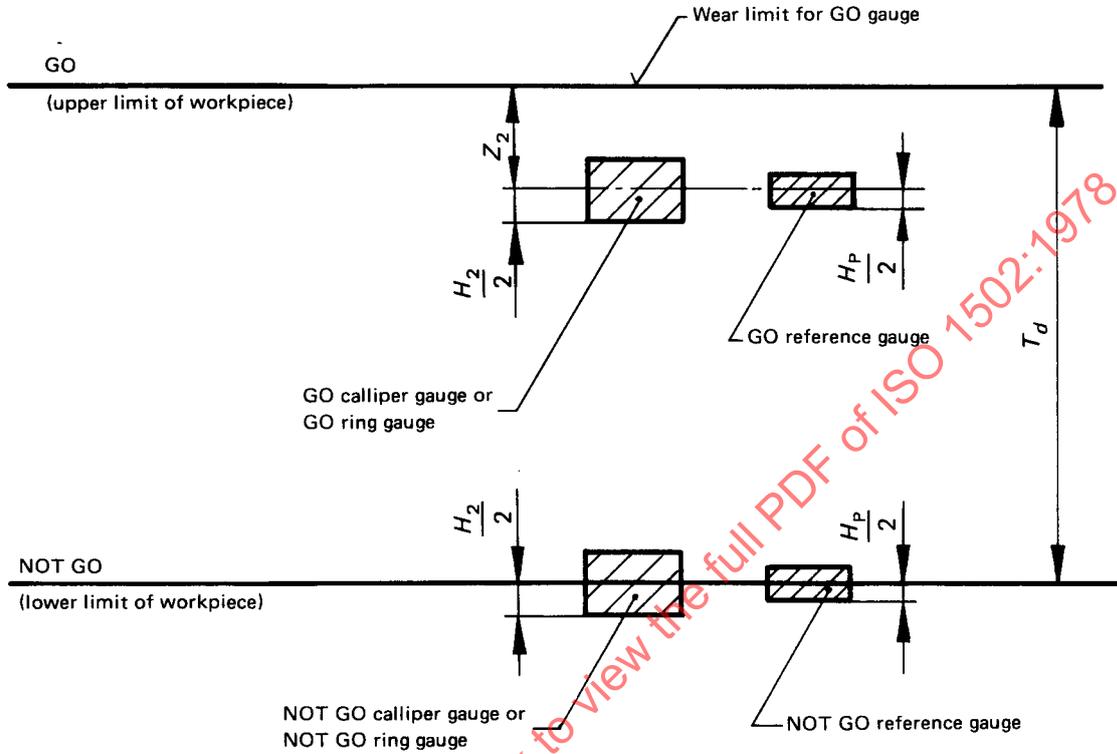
Tolerance zones for plain gauges for major diameter of external threads (diagram)
